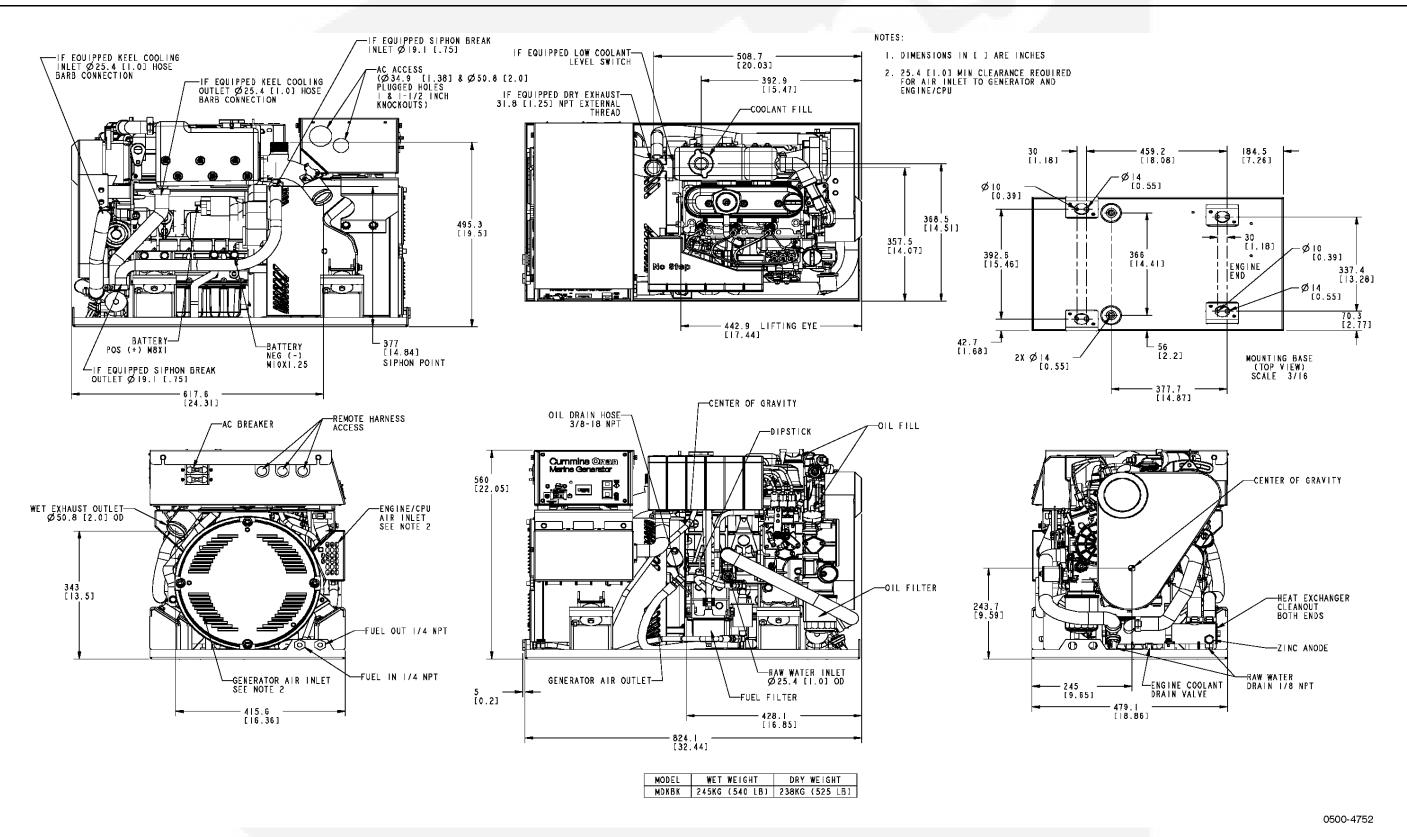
MDKBK OUTLINE DRAWING (SHEET 2)
